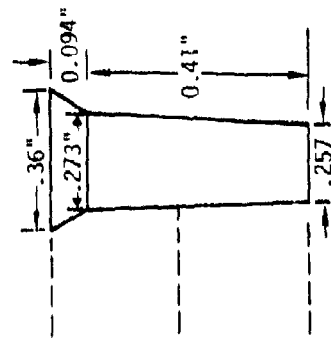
Representative Cross-Section of Wing Lap Joint.
